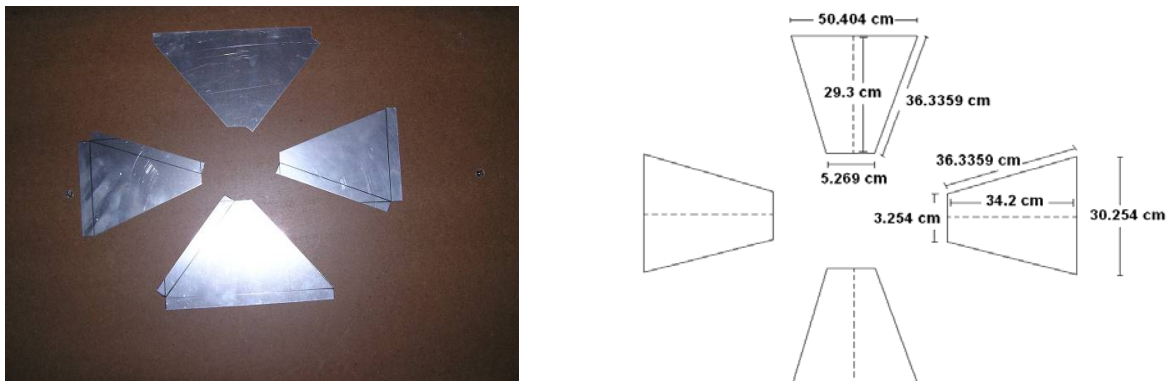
The constructed tapered section parts (left); The tapered section part dimensions (right)
